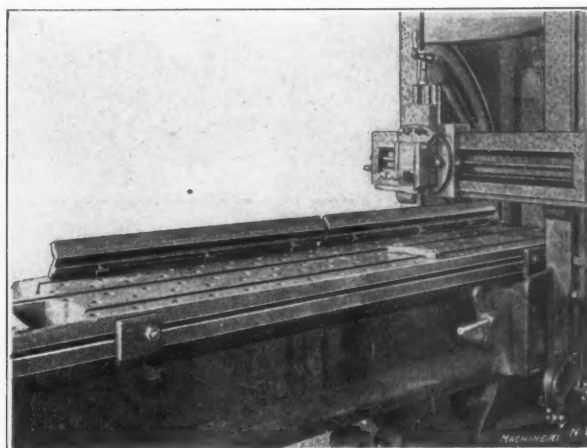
Back Stops Used for Holding the Brackets Bottom up.
